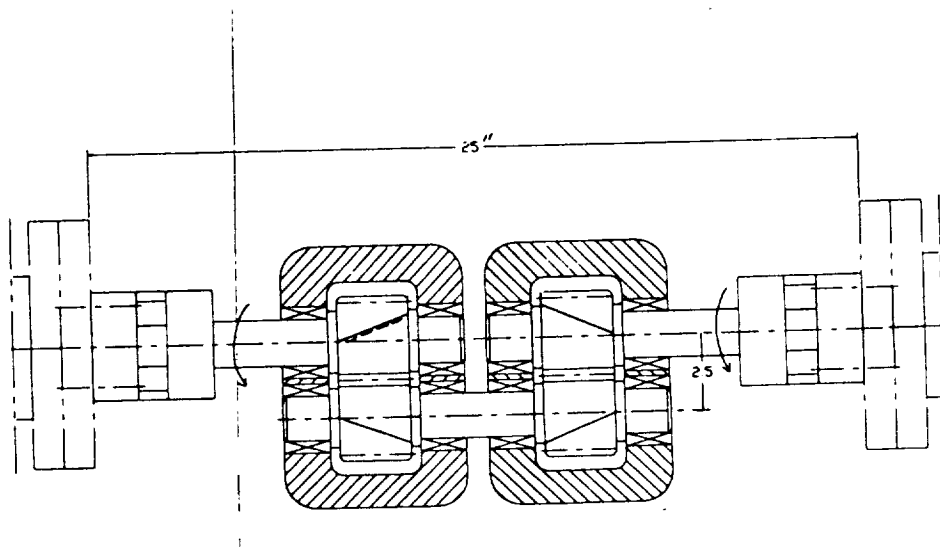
(b) Test gear box (1) and motion reversal gear box (2) for schenck pegasus test set-up
